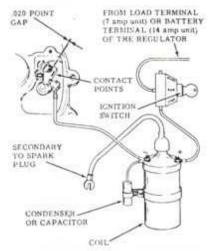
Typical battery ignition wiring dia-gram used on some HH80, HH100 and HH120 engines.
